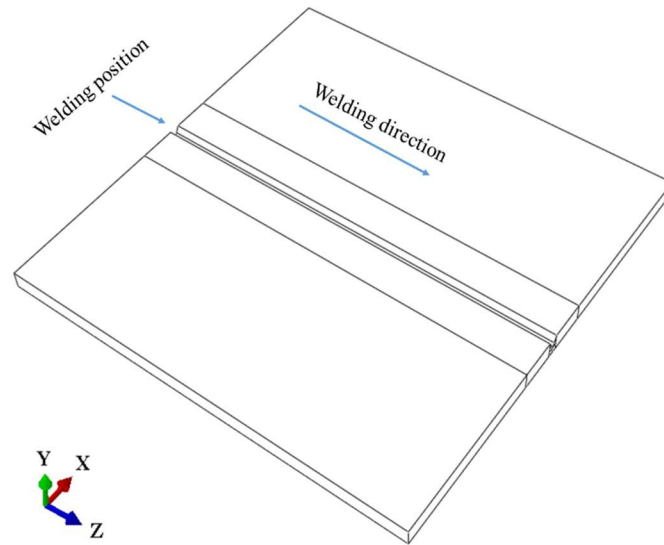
Location and position of an only one pass weld for welding two pieces of plates with the same geometry 200\*100\*8 millimeter.
